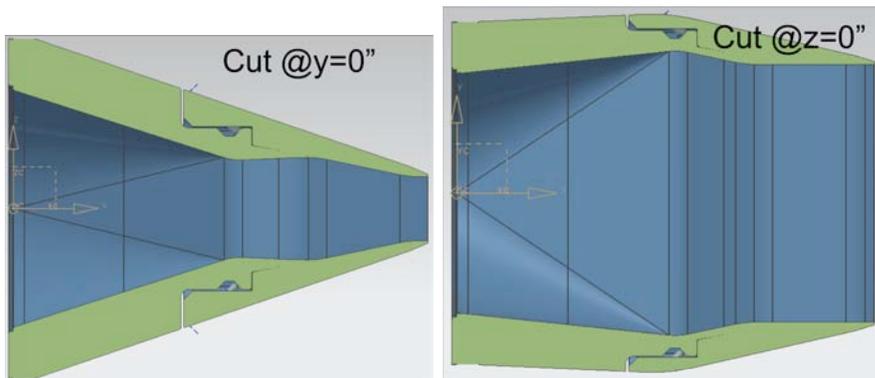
ASSEMBLY CROSS-SECTION INCLUDING DR2A4, NA4Z
